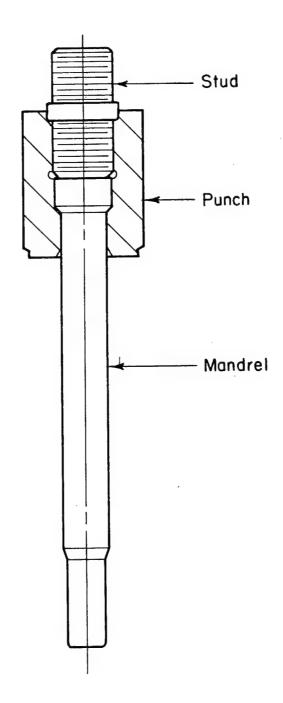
ASSEMBLY DRAWING OF PUNCH AND MANDREL
